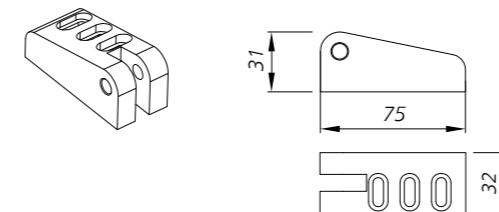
Top console for mounting type G spindle actuator on the smoke exhaust window, dimensions [mm]
